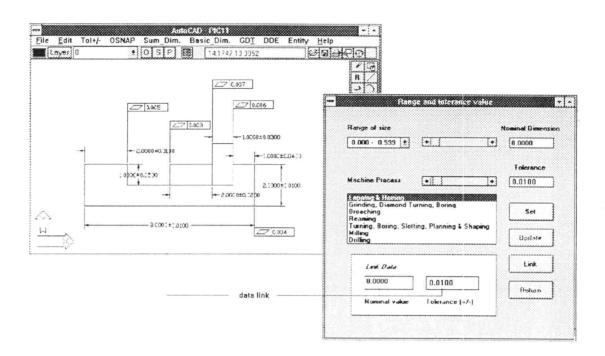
Updating Conventional Tolerance in the  ${\tt AutoCAD\ Drawing}$
